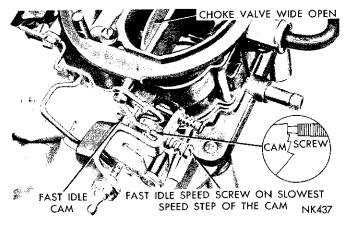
Fast Idle Speed Adjustment (on the Engine)
